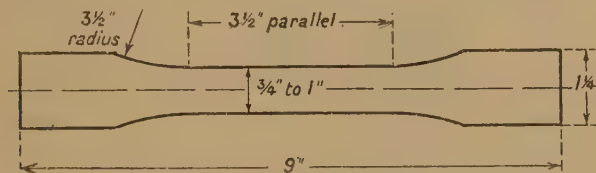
Specimen for Tensile Strength and Extension Tests in Boards.
